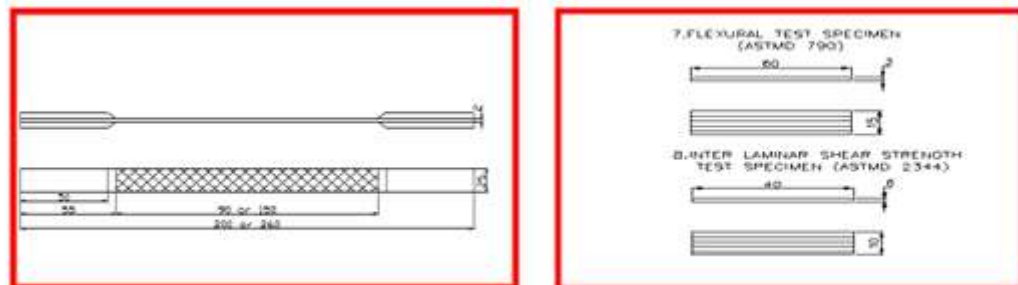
(c) In plane Shear Test Specimen (ASTM D 3518) & Flexural specimens as per
